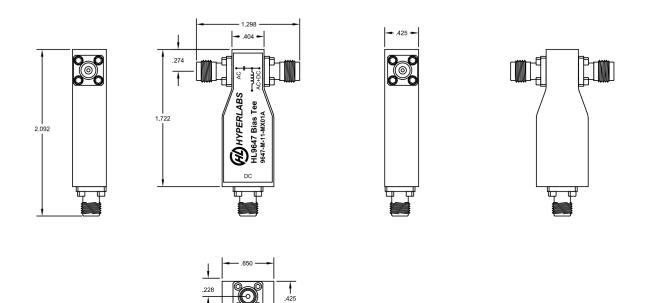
HL9647 with SMA DC bias port Mechanical Drawing
